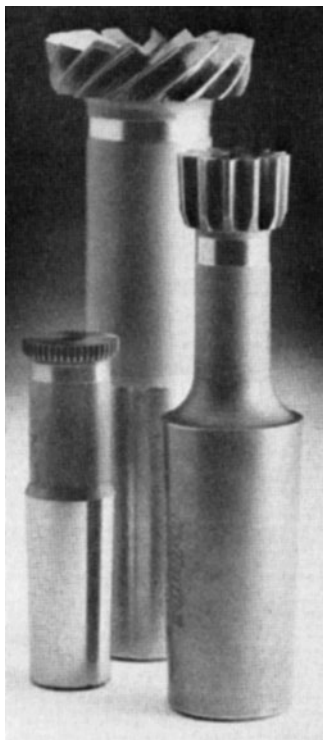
Shank-type cutters for relatively wide face gears. (Courtesy of Fellows Corp., Emhart Machinery Group, Springfield, Vermont.)
